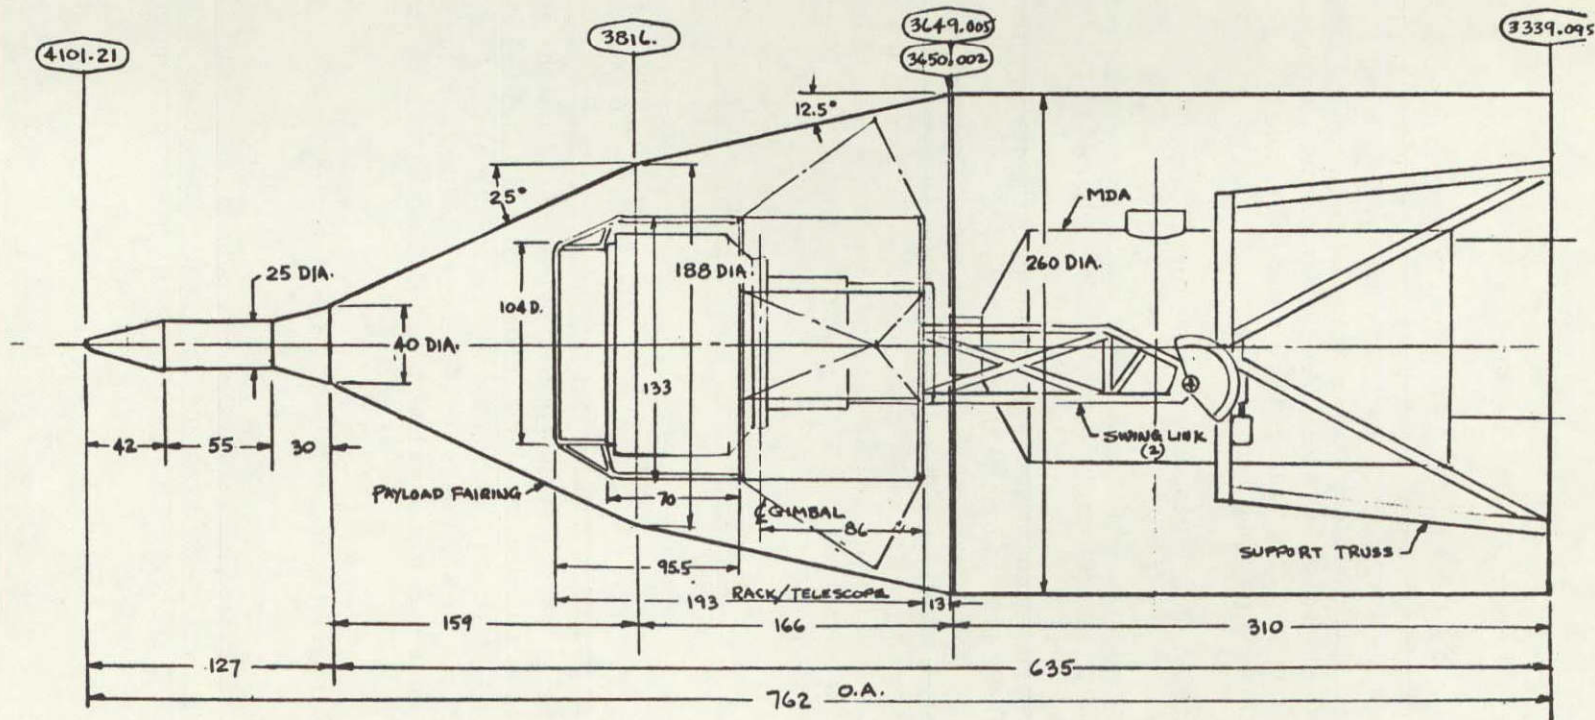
6-Section Telescope Mounted Within Dry Workshop Payload Fairing
